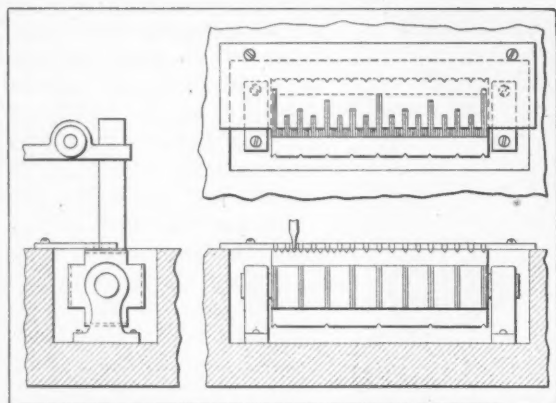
Type of Master Copy used for graduating Scales on Hope Machine
